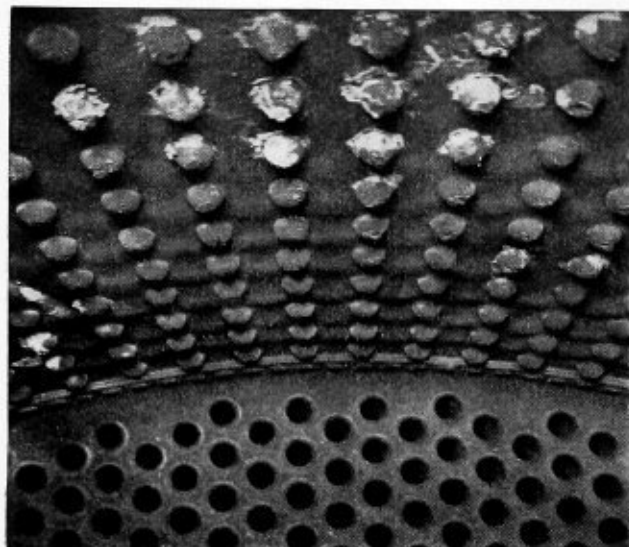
BULGING OF CROWN SHEET BETWEEN STAYBOLTS
